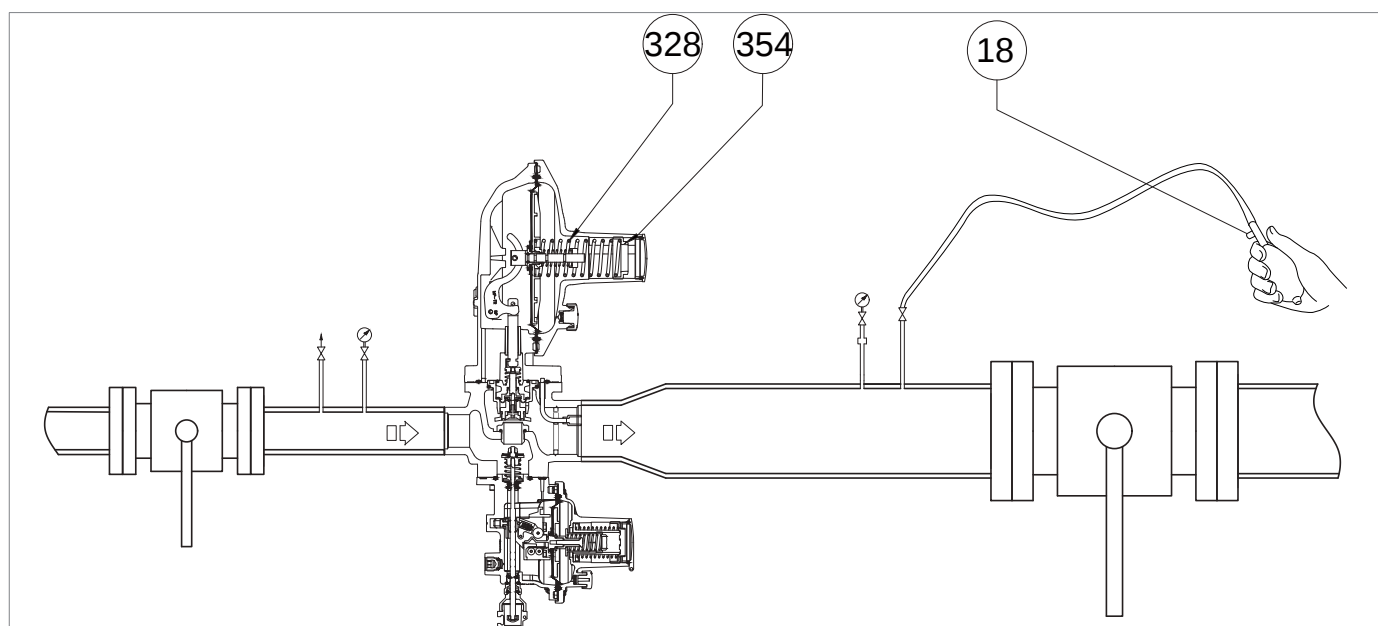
Pressurising with external source for incorporated LA slam-shut valve
